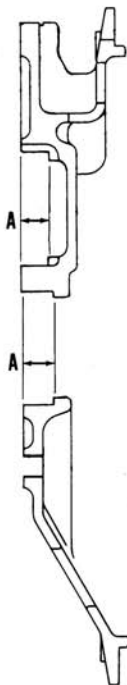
Measure distance (A) from mounting flange mating surface to bottom of input and output shaft front bearing outer race bores to determine "A" measurement for establishing correct shim thickness. See text.
